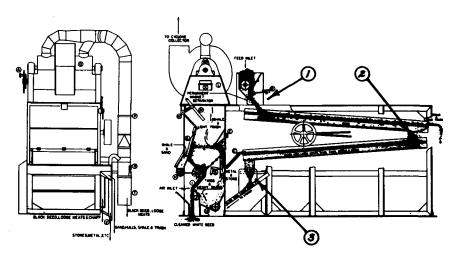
Fugitive dust points on Bauer 199 cleaner.
